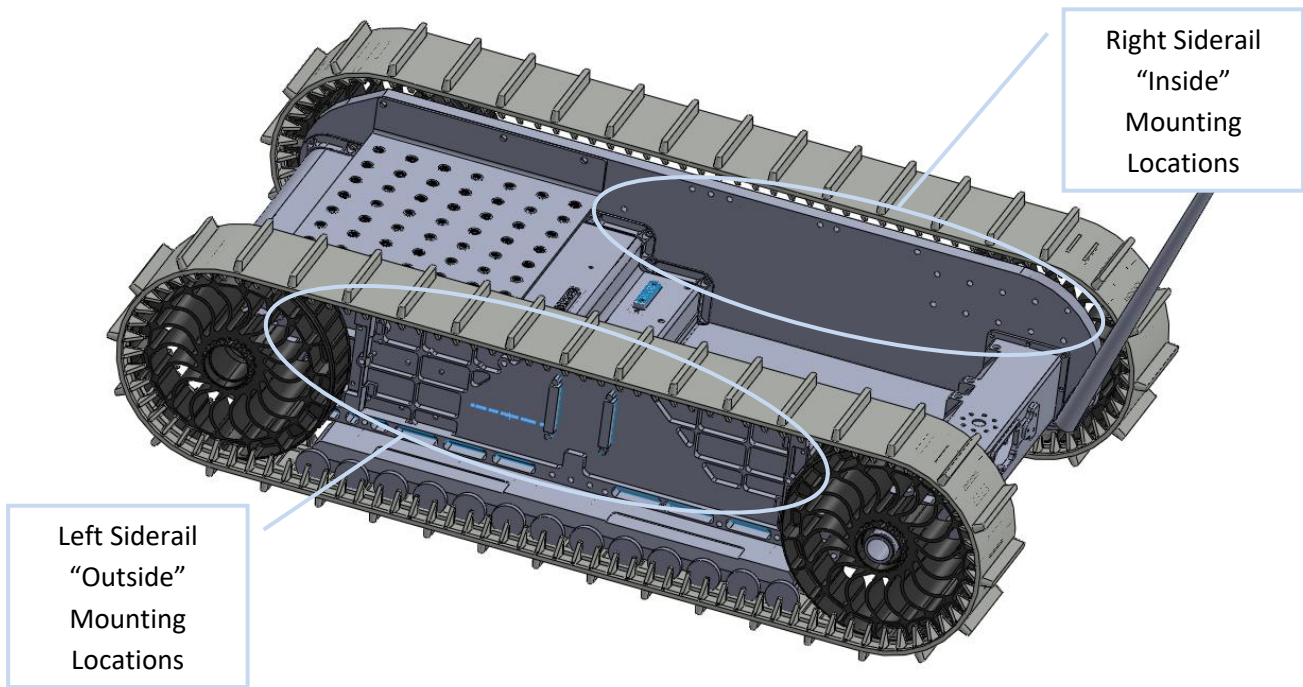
View of Mounting Holes from Left Side of Vehicle
